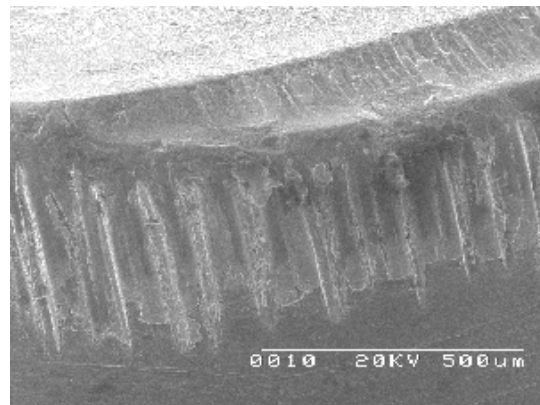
Wear generated after machining Inconel 718 with nano-ceramic T3 cutting tool at a cutting speed of 270 m/min and a feed rate of 0.125 mm/rev.
